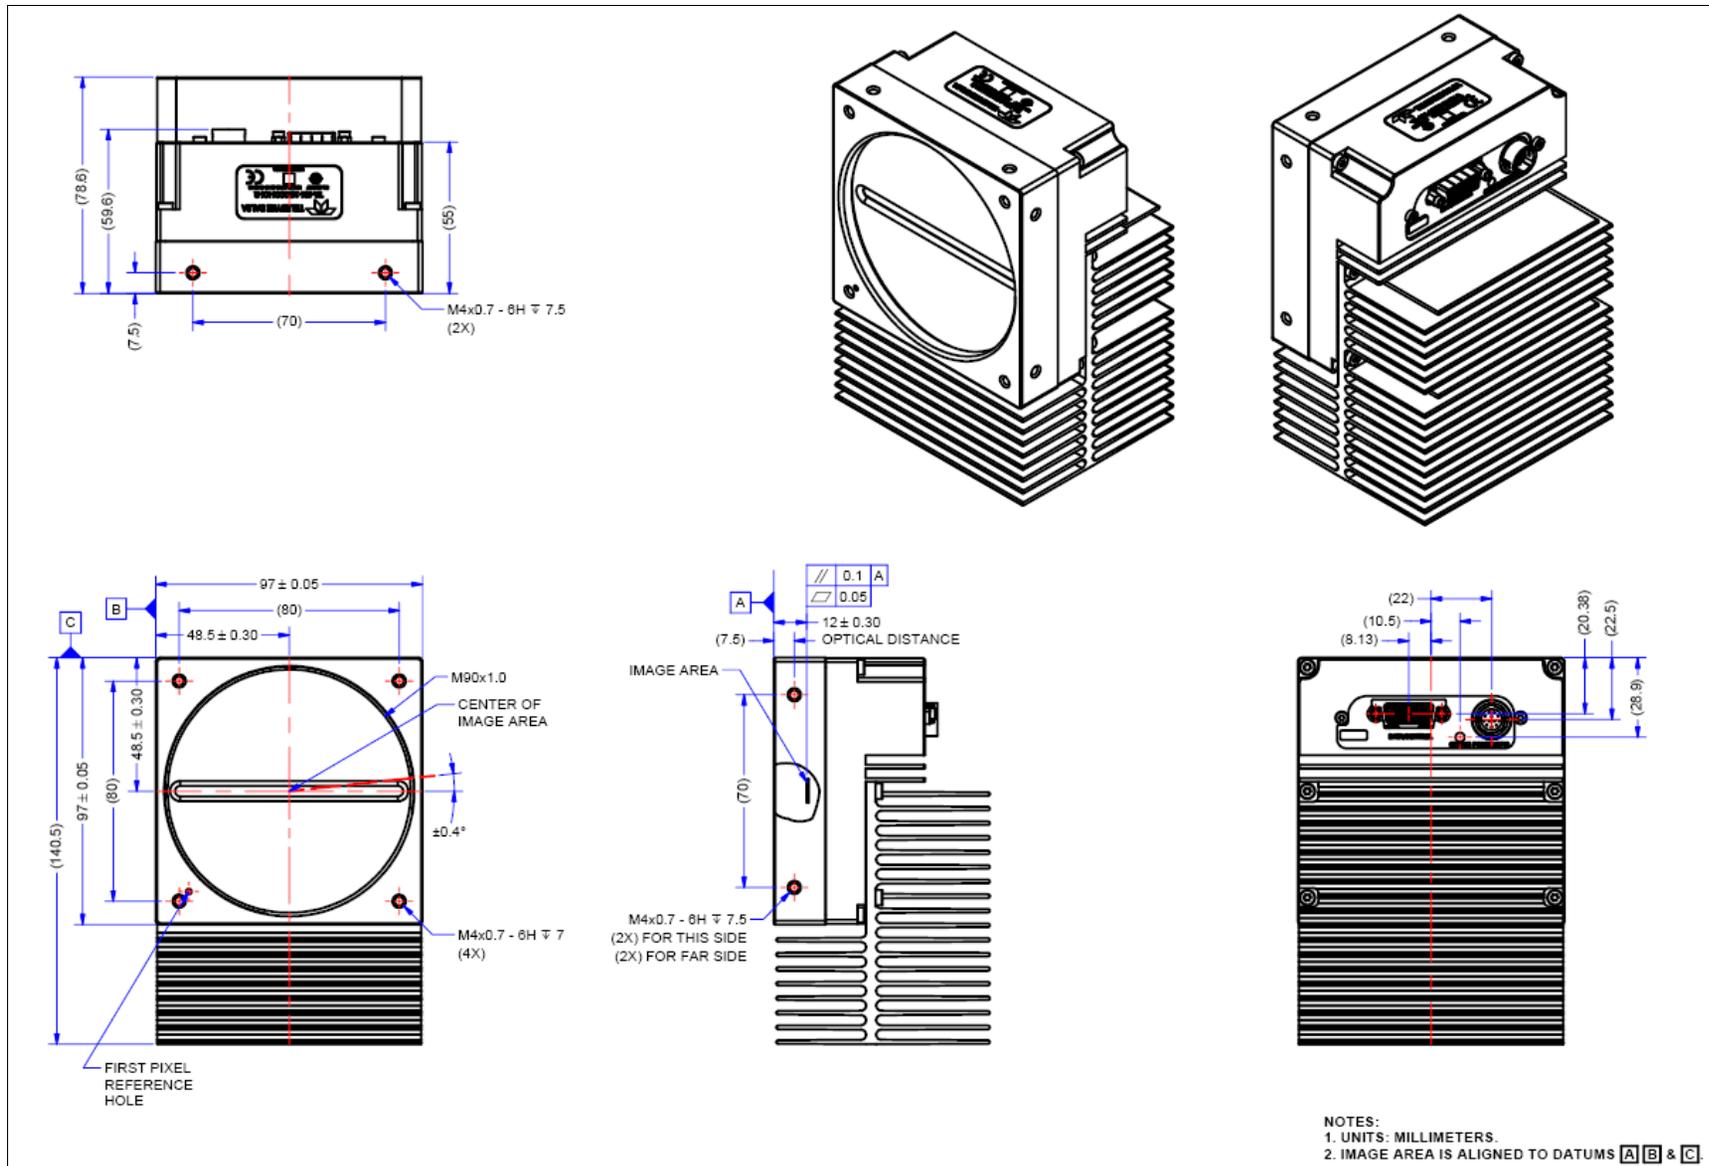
HL-HM-13K30H-00-R, HL-HM-16K30H-00-R, HL-HM-16K40H-00-R, HL-HM-16K40H-00-B, HL-HC-16K10T-00-R, HL-HM-32K40S-00-R and HL-HF-16K13T-00-R Mechanical Drawing
